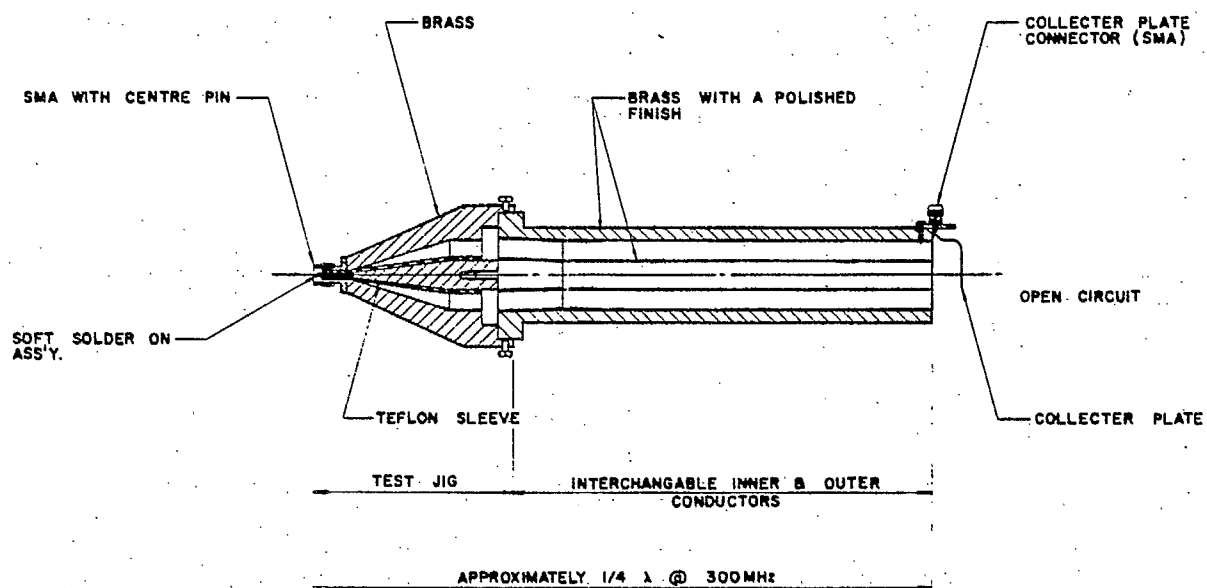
Balun test sample and jig for multi-pactor experiments.
